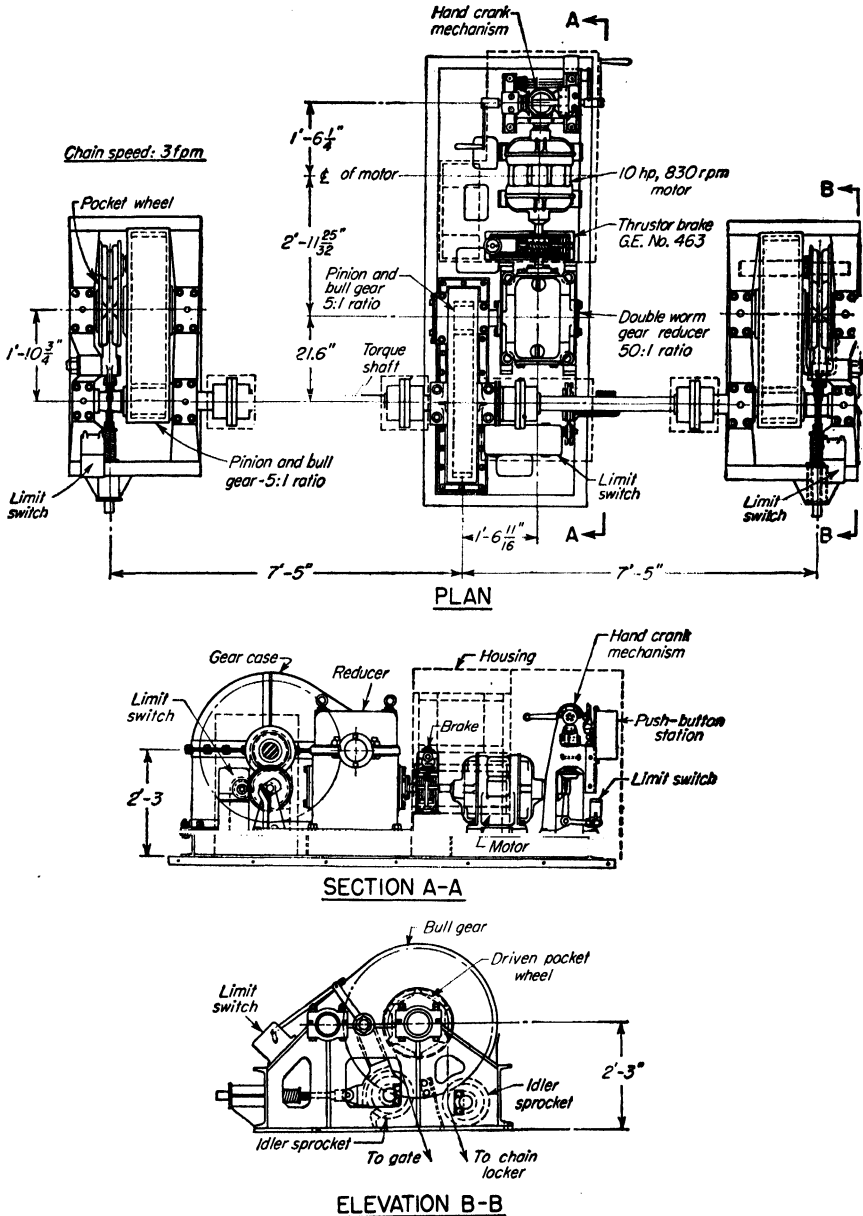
Forty-ton fixed hoist for Tainter crest gate, Apalachia Dam, T.V.A.
